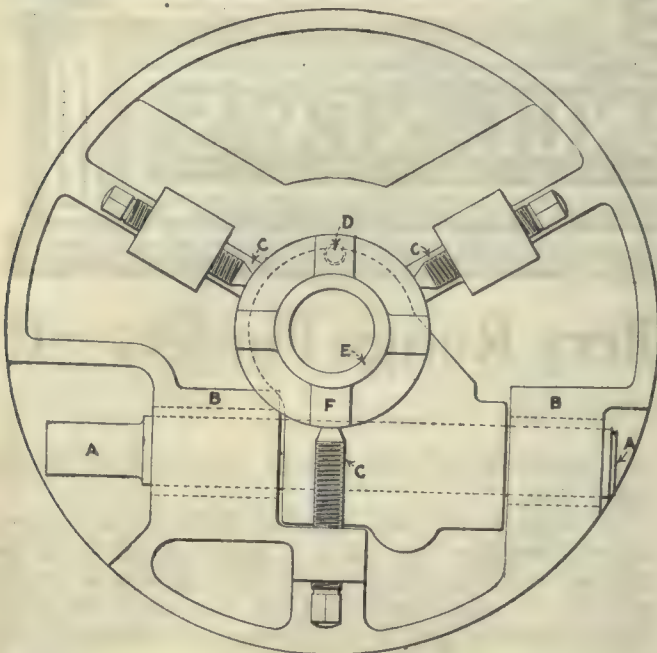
SCHEMATIC DRAWINGS OF THE HOODED LATHE CHUCK USED IN MACHINING GUN-SIGHT BRACKET
